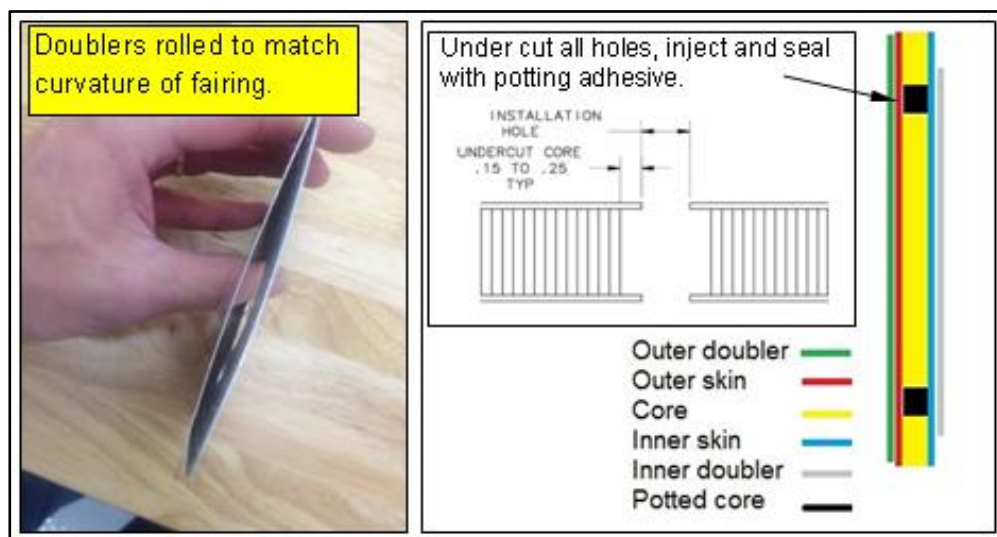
Composite and fiberglass panel installation. When required fit/roll doublers and door to match panel. Undercut, pot and seal of all open edges. Verify through applicable Airframe Manufacturers procedures proper rivet material for location of installation. Composite panel installations may require Monel rivets vs. aluminum rivet in fiberglass.
